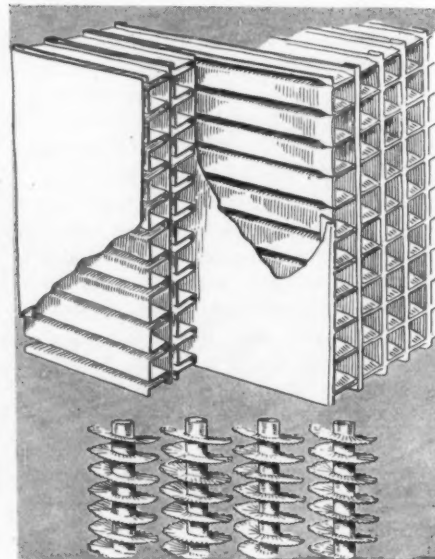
ZIG-ZAG TUBULAR. AT BOTTOM TUBULAR WITH SPIRAL FINS
